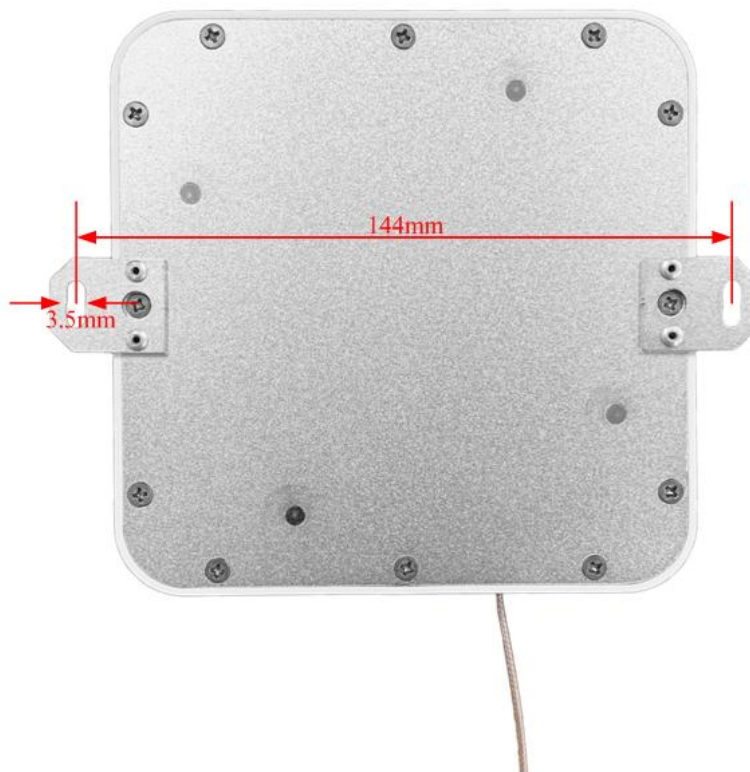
128 Antenna hanging ear spacing and hole diameter dimensions
